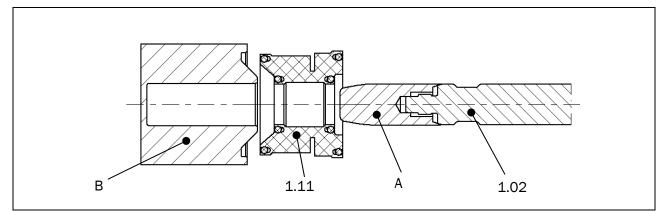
Overview of Assembly of Central Bearing with Assembly Cone
